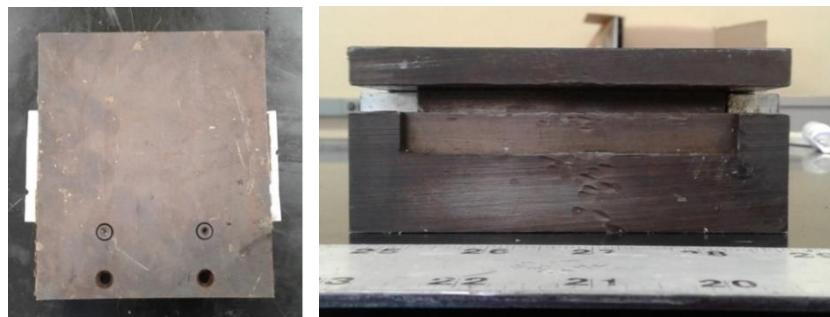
Closed mold with aluminum spacer bars in the mold halves top (left) and side (right) view.
